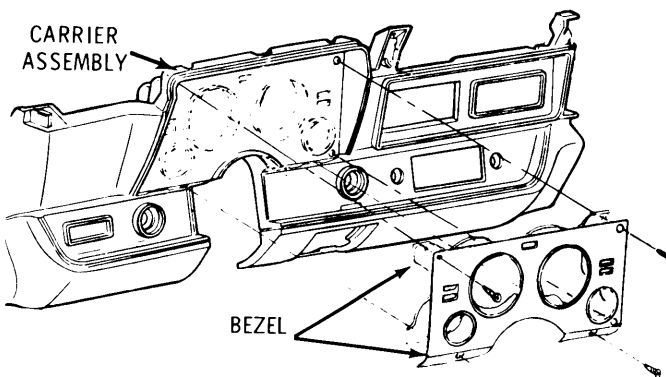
Exploded View of Instrument Panel Cluster — All Other "H" Body Models
